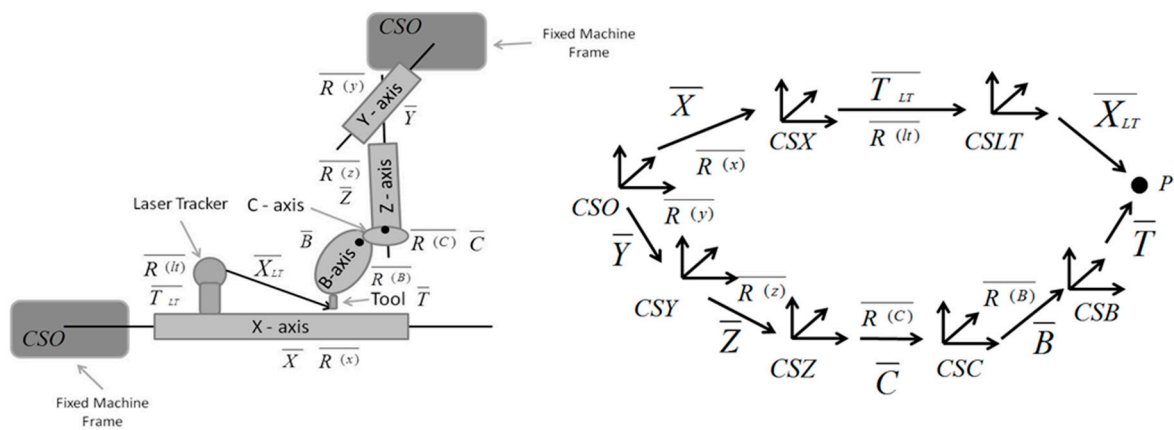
Kinematic chain and kinematic model of Zayer TB 5000 machine tool (MT).
